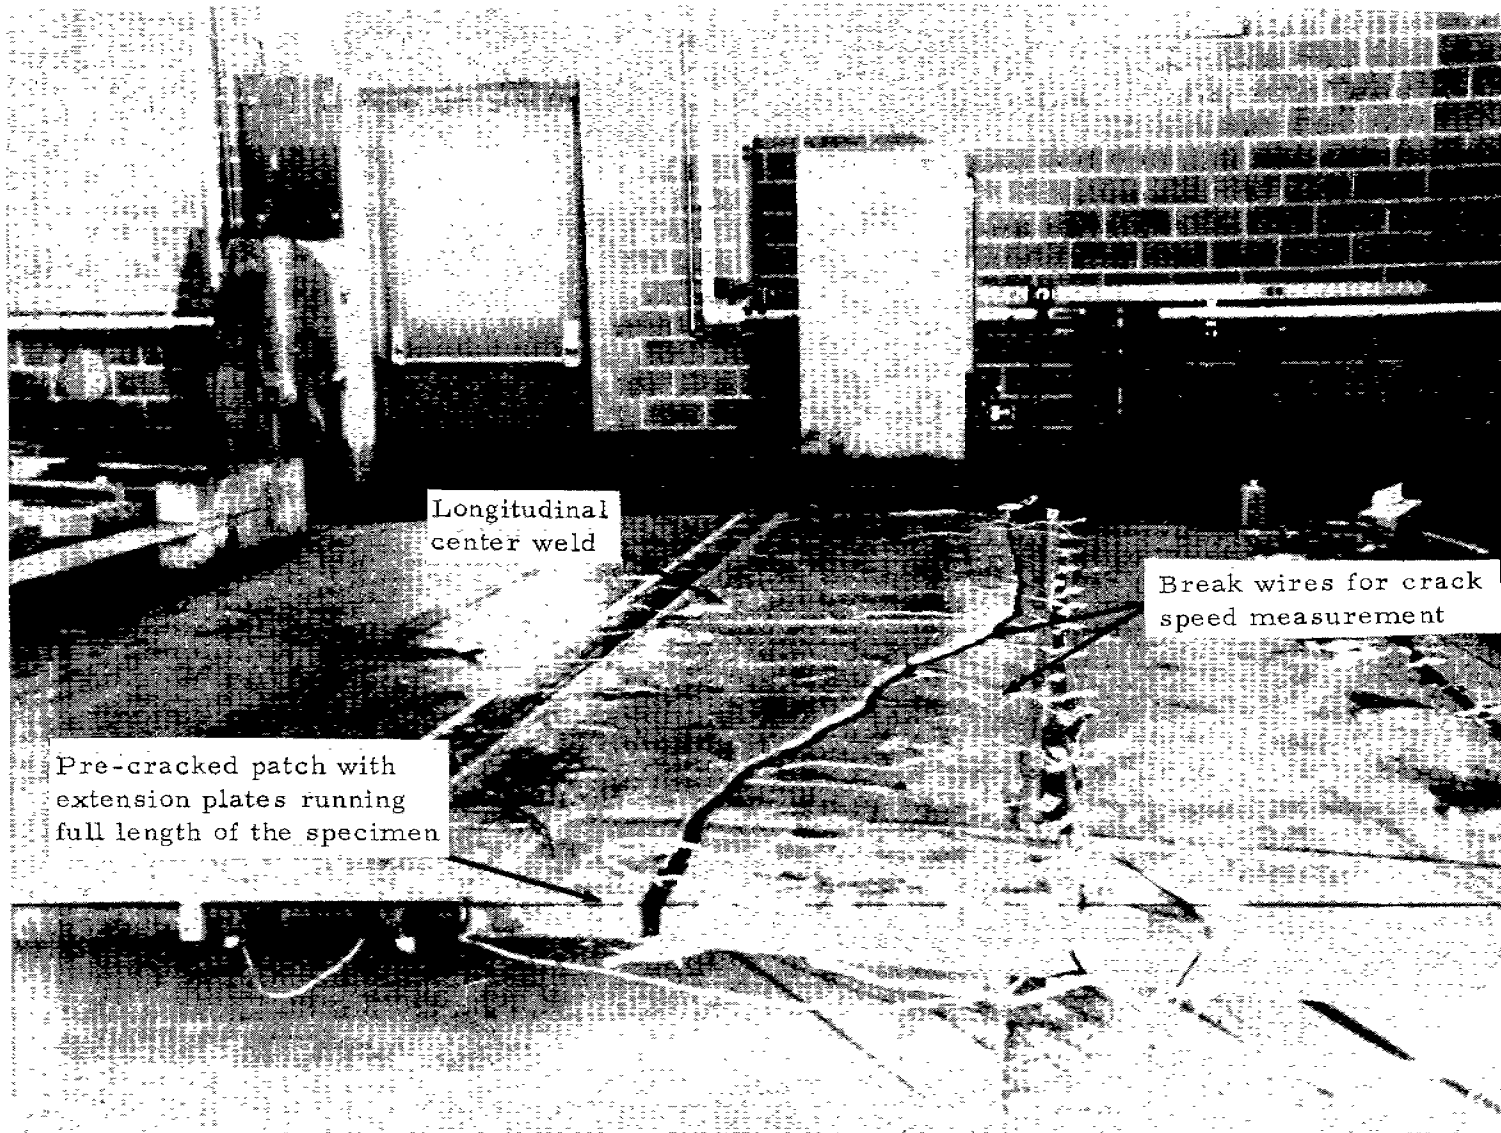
Overall View Of The Fracture - Test B9; Specimen Configuration: 5-1/2" Edge Slot Plus 1/2" Fatigue Crack In A 120 x 12" Patch. Specimen Has Weld Along The Longitudinal Centerline; Test Temperature: +10°F; Fracture Stress: 43,000 Psi On The Gross Section; 45,300 Psi Avg. On The Net.
